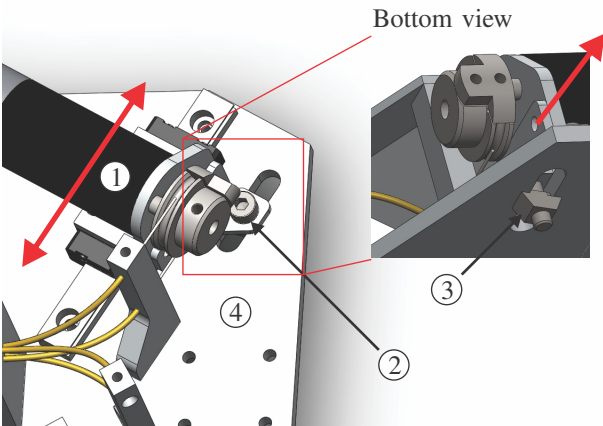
Pretension mechanism. The motor assembly ① is mounted to a linear slide. A force greater than the force required to bend the instrument tip should be applied to the motor assembly, placing tension on the tendons (see insert). Tension remains in the tendons when tightening bolt ②; Nut ③ secures the motor assembly to the instrument base plate ④.
